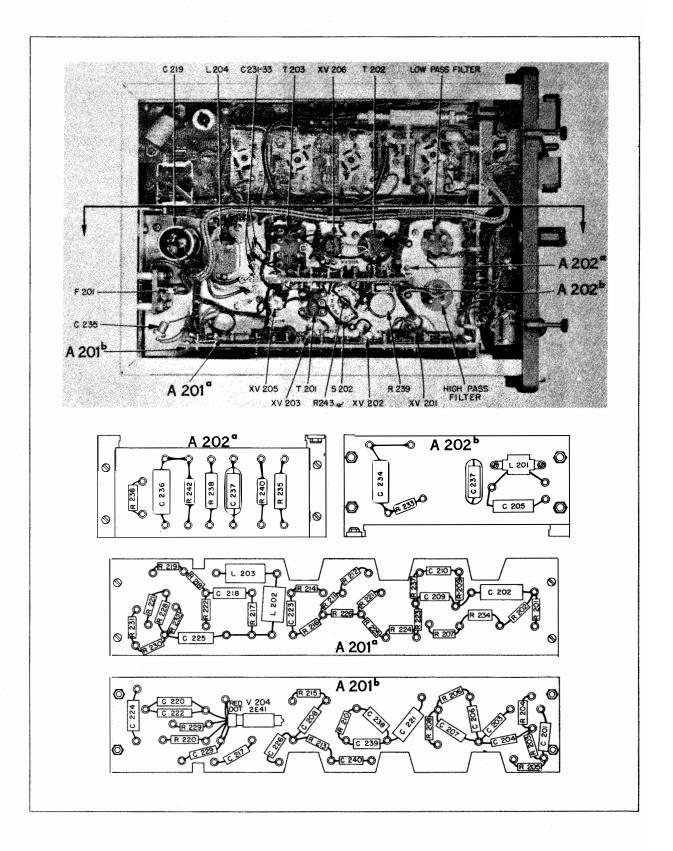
Underside of IF-AF Chassis, Showing Component Locations.
